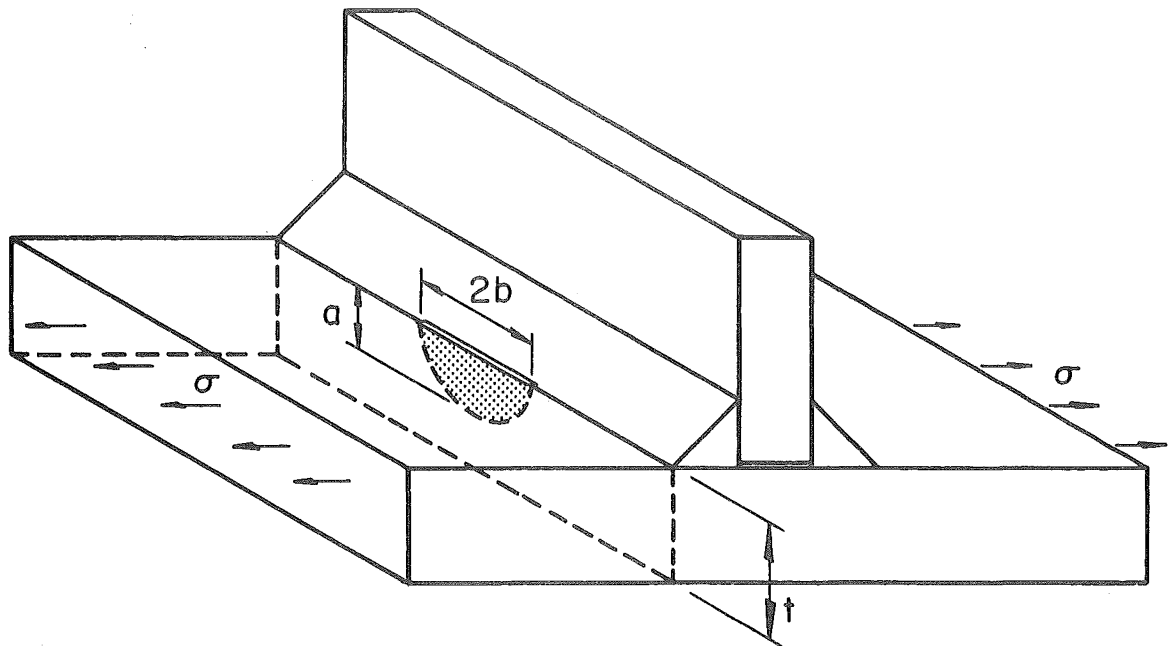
Part-through crack at the toe of a non-load carrying fillet weld
